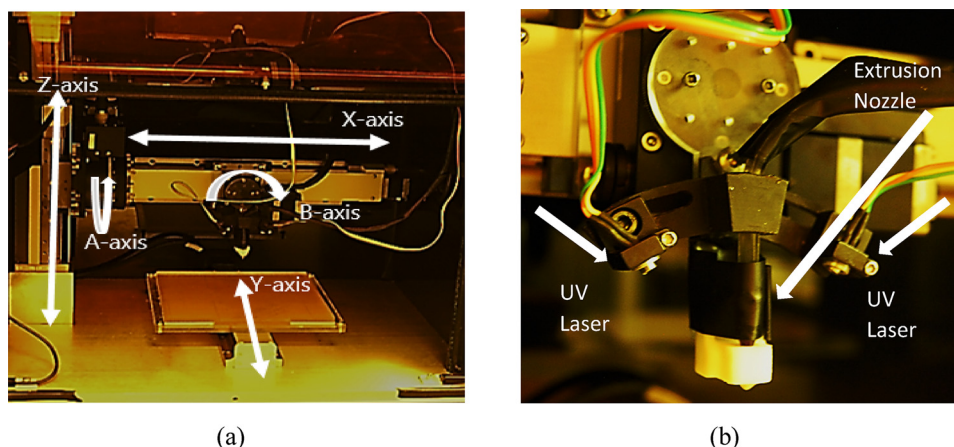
(a): 5-axis PPE printer (b) UV laser and extrusion nozzle.
